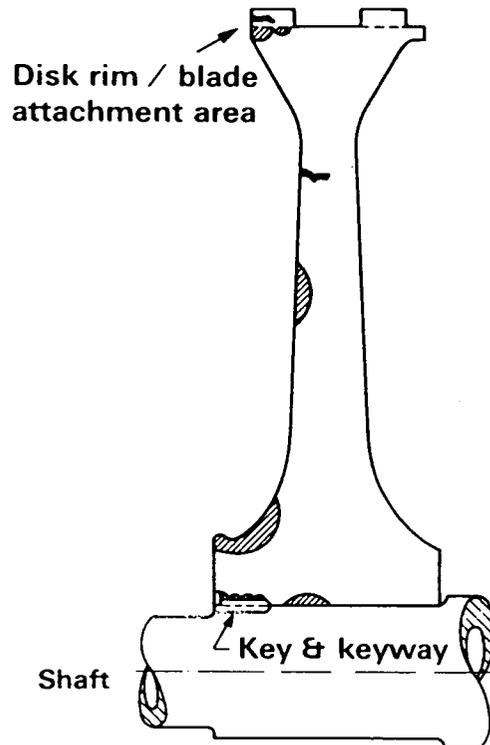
Stress corrosion cracks in shrunk-on disks
